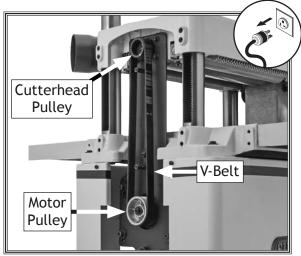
Belt cover and side panel removed to expose V-belt and pulleys.
